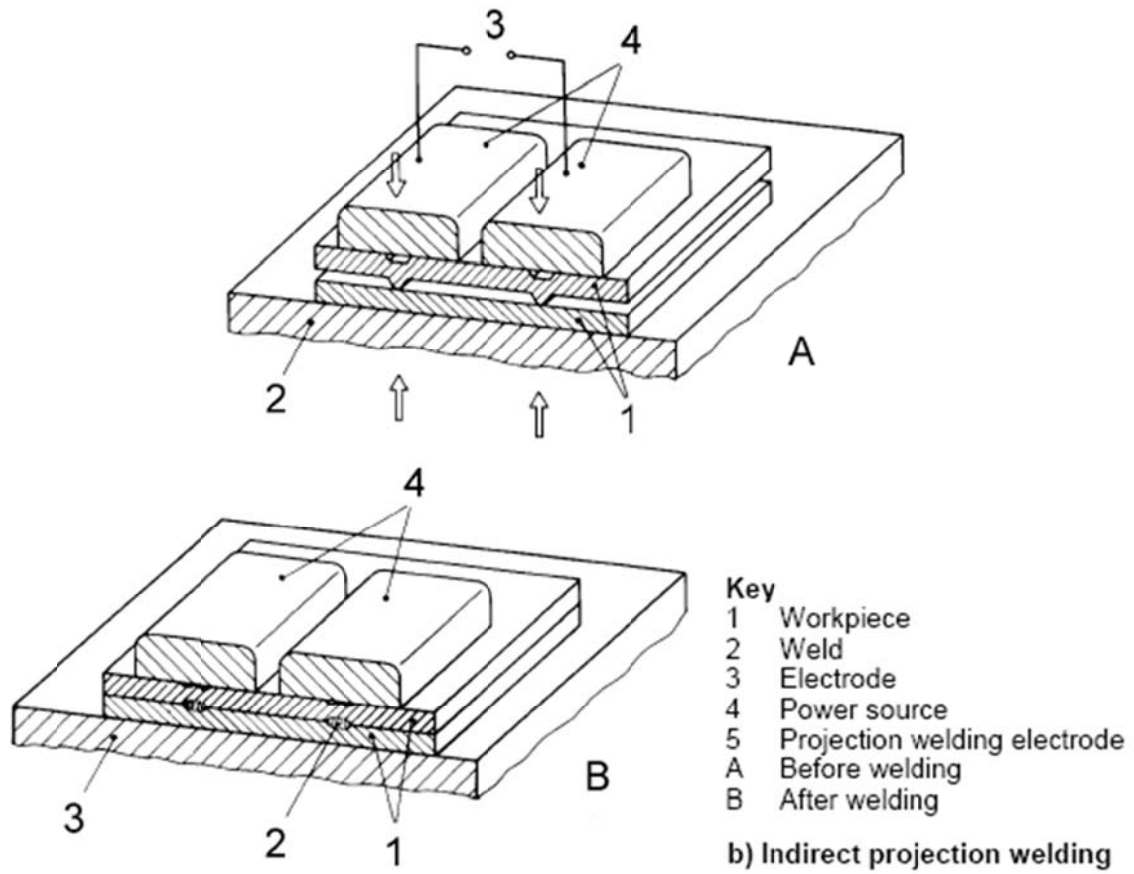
Indirect projection welding before and after welding (ISO 669)
